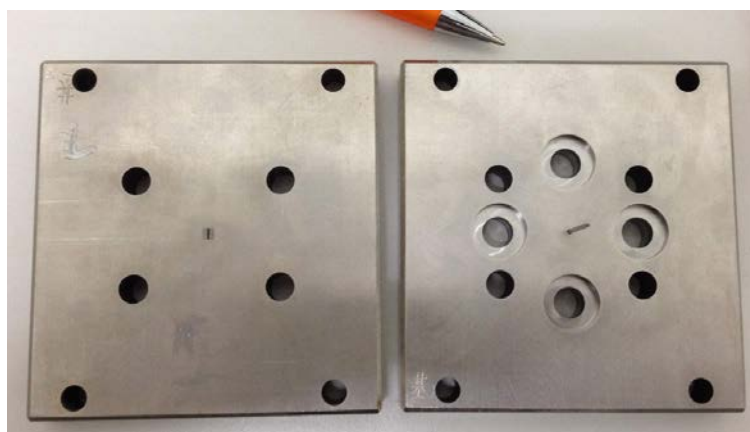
Photo of the assembled upper mould and the lower mould.
